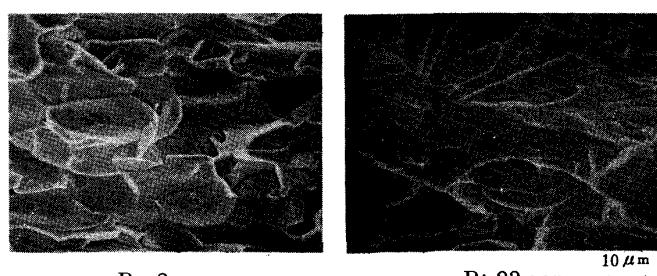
Fractographs of cylindrical cup fractured at 10°C
